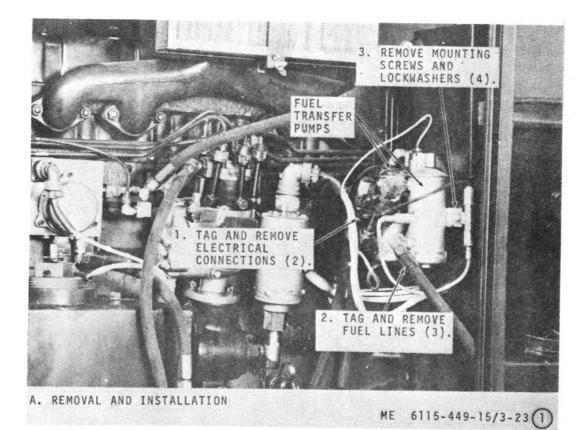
Fuel transfer pumps (Sheet 1 of 2).
